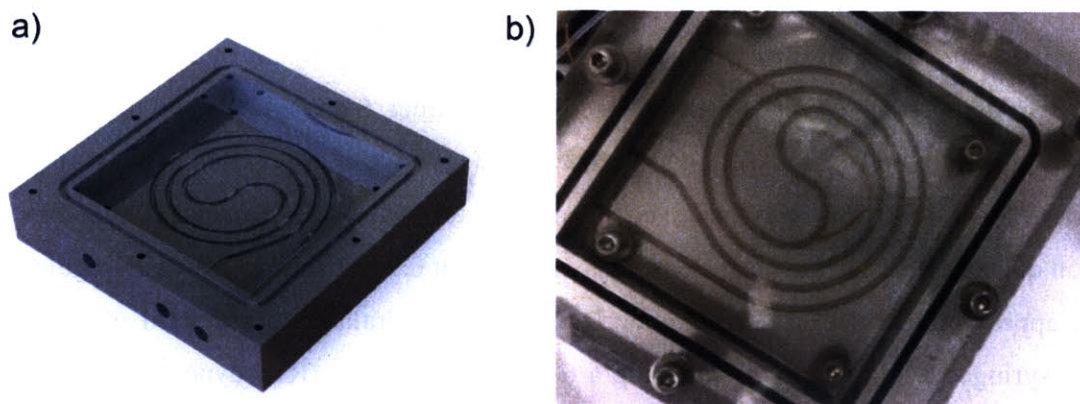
Pressure-sealed “pancake” reactor comprising a Teflon tube in an aluminum housing, (a) SOLIDWORKS rendering and (b) photograph of packaged device with polycarbonate cover, FEP tubing, and thermocouple.
